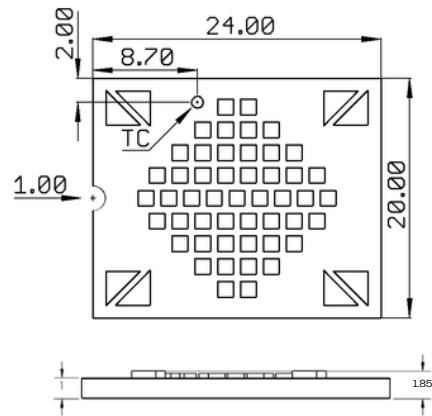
L513A-RGBxxxY Mechanical Drawing
